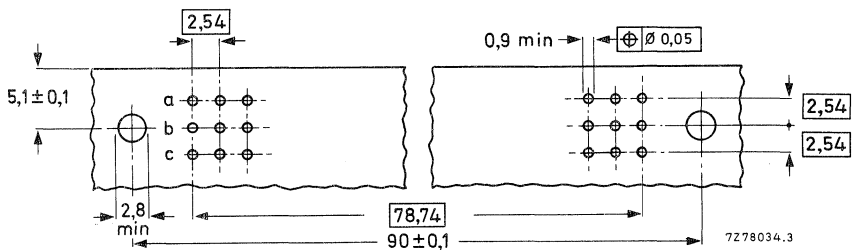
Hole pattern of the board for a female part with 3 x 32 contacts (style C): for 2 x 32 contacts (style B) the holes of row c are omitted.
